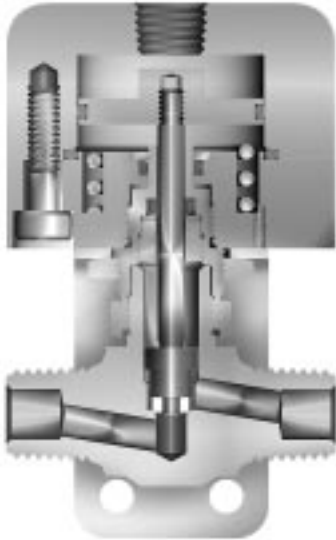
VQ-11AO Series Actuated Valve Cross Sectional View
